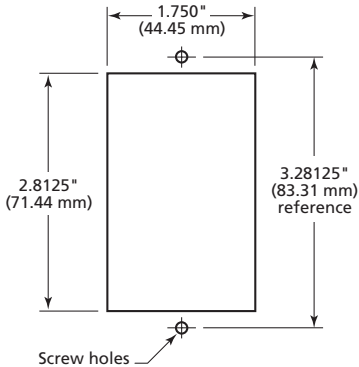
Wall Outlet (NEMA-WD6) Dimensions
